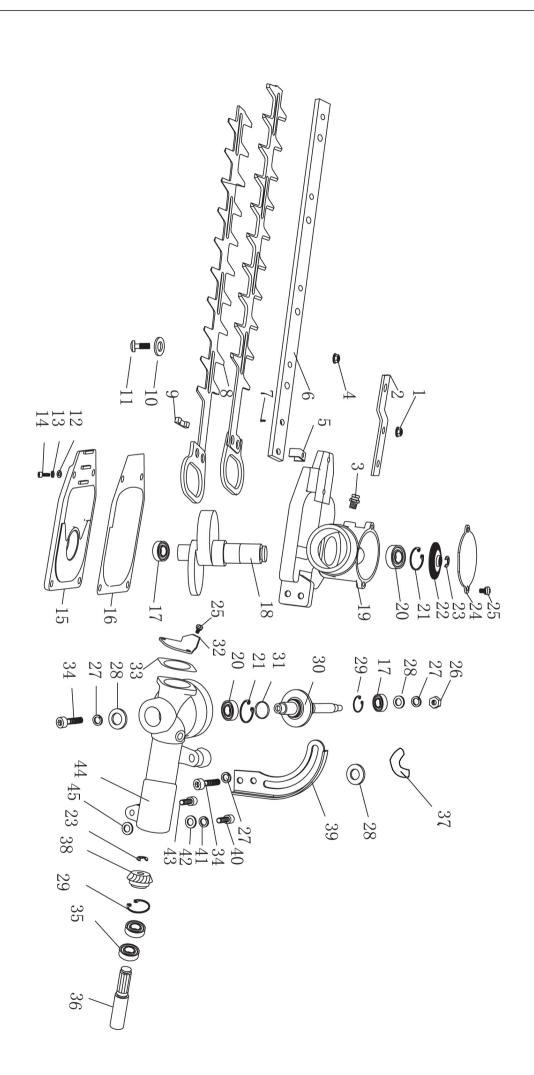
SPARE PARTS LIST OF LONG REACH TRIMMER 高枝剪明细表
